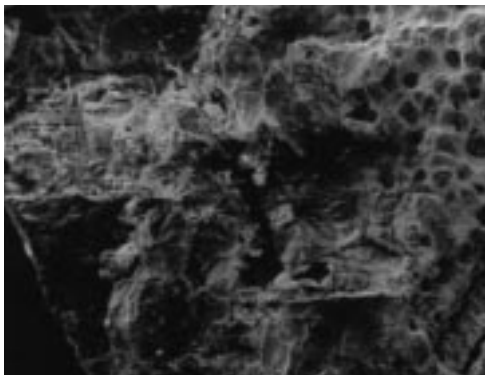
Dross inclusion in a crankshaft. Cause of early failure in torsional fatigue testing
